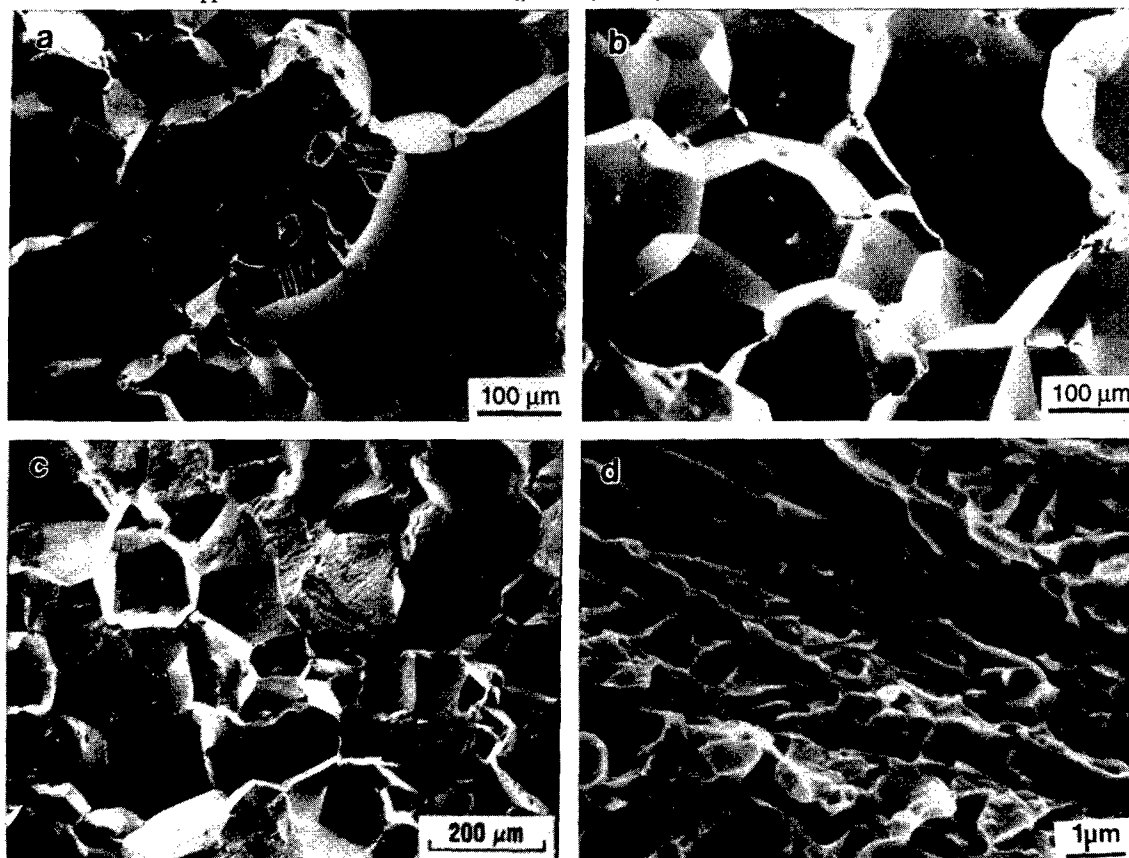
Fracture surfaces of the quenched and aged tensile specimens: a) 300°C/1h, b) 400°C/24h, and (c,d) 500°C/24h.
